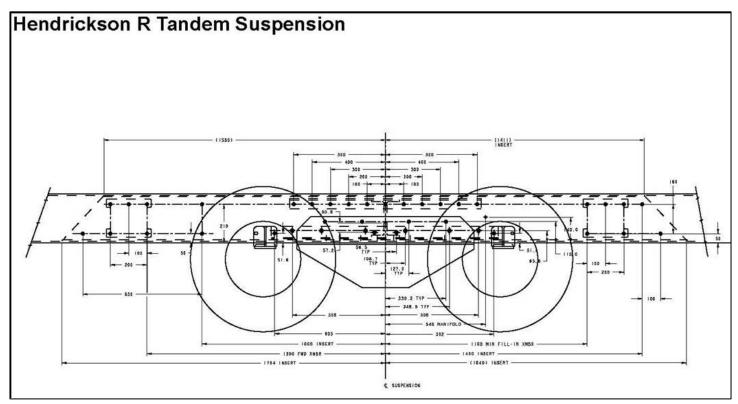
Hendrickson R Tandem Frame Drilling (Dimensions In Millimeters)
